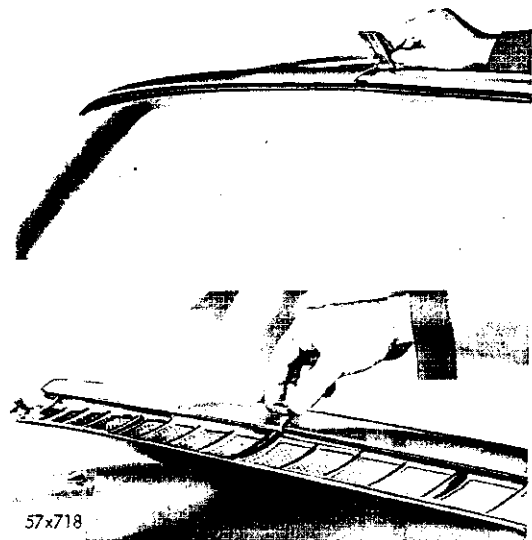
Removing the Upper and Lower Moulding Clips (Imperial Models)
